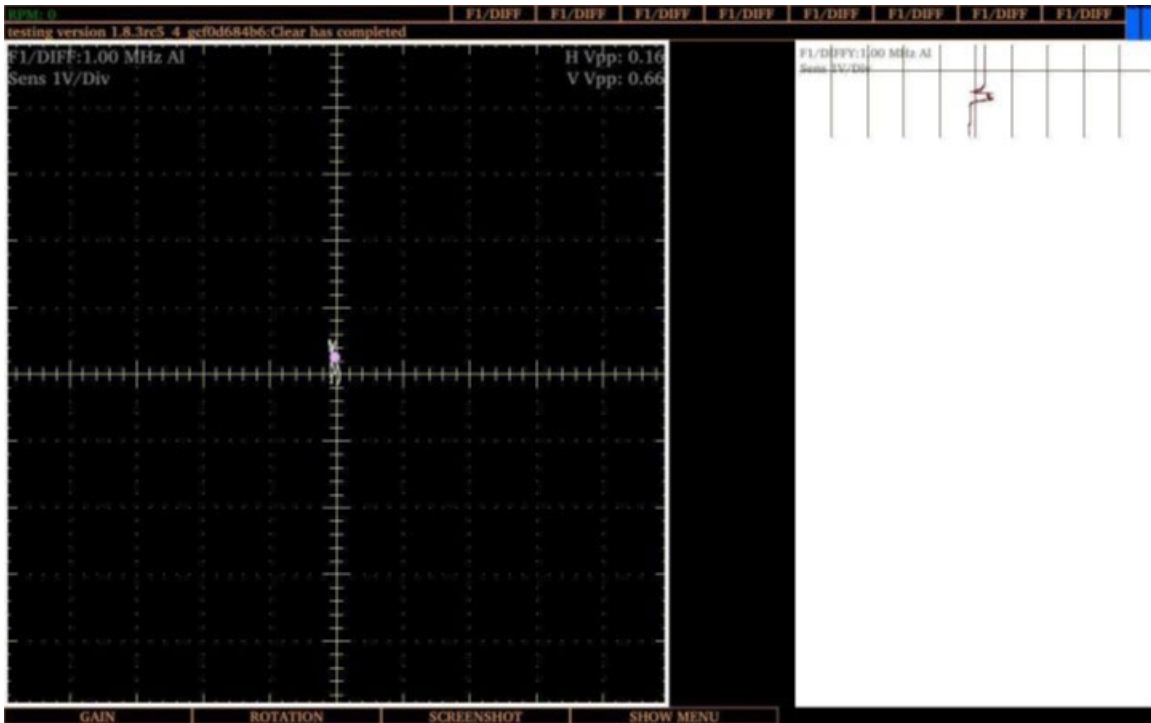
ET indication of defect at Location A in fillet weld test panel MGL-3
